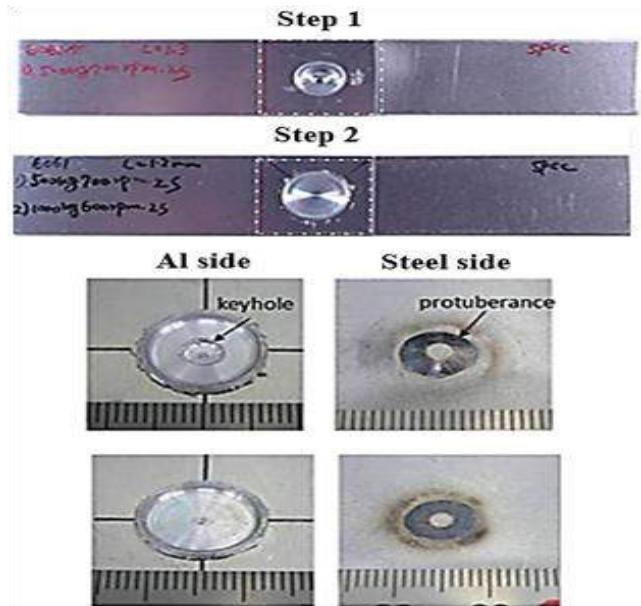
Appearance of the welds after the first step and the second step [19].
